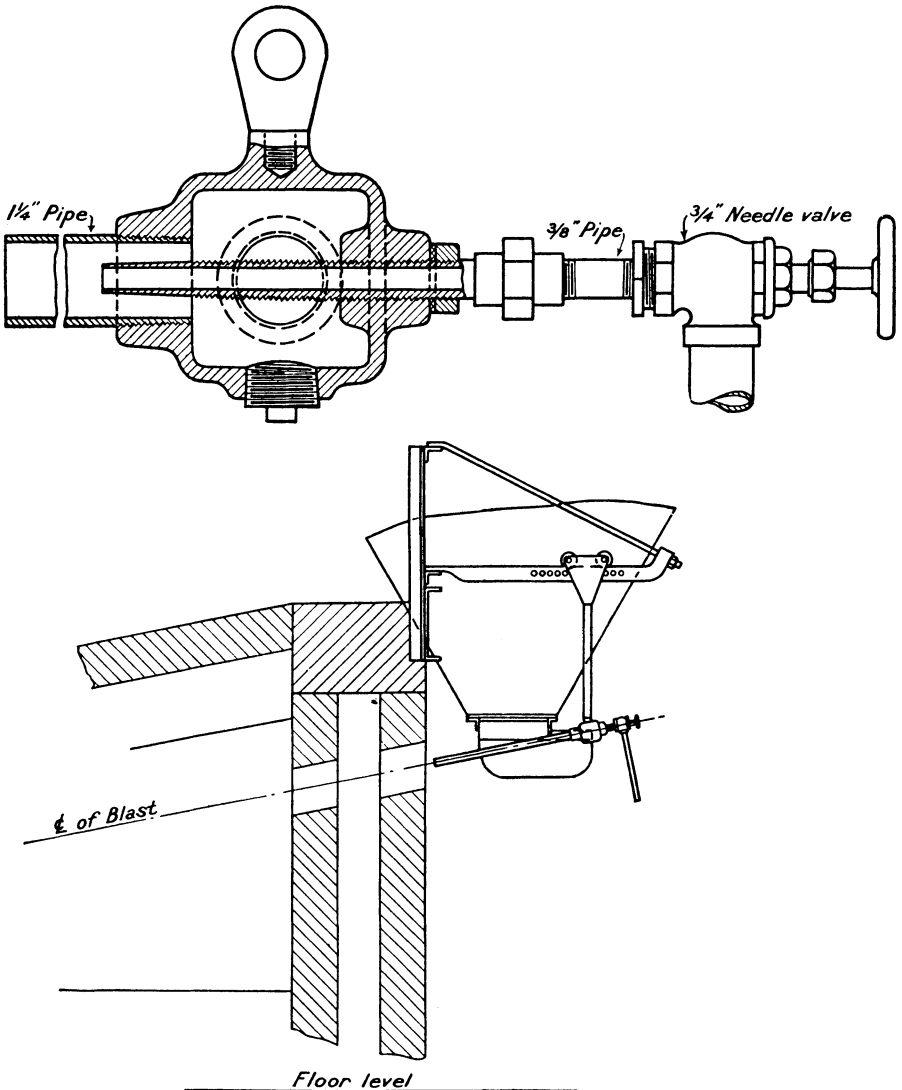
Coal feeder and burner for open-hearth furnace.
